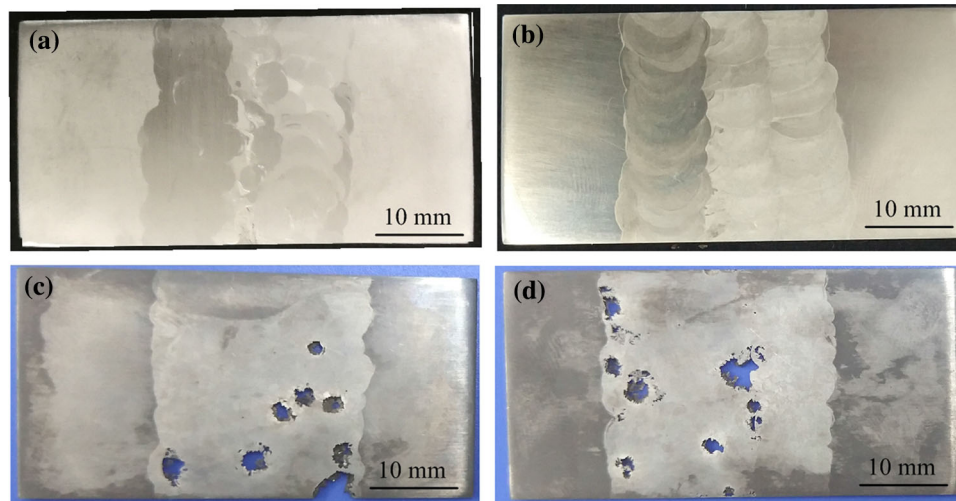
Macroscopic morphology of pitting corrosion specimens a and b using 309MoL, c and d using 309L
